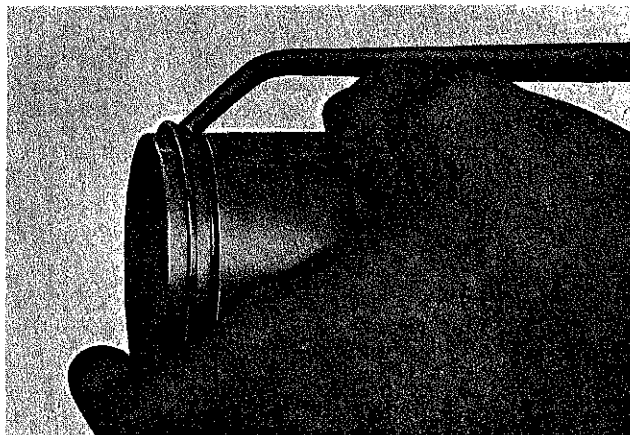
Oiling the piston and rings before inserting them into the cylinder.
